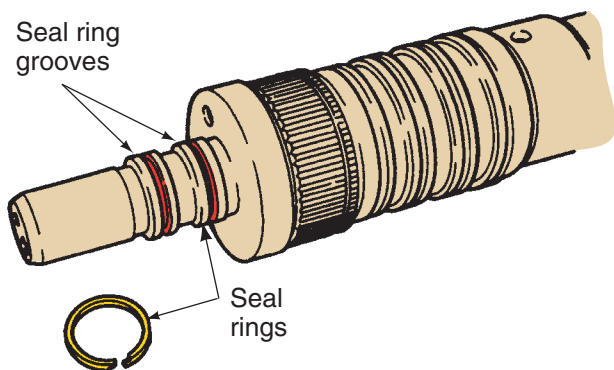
Metal sealing rings are fit into grooves on a shaft.
